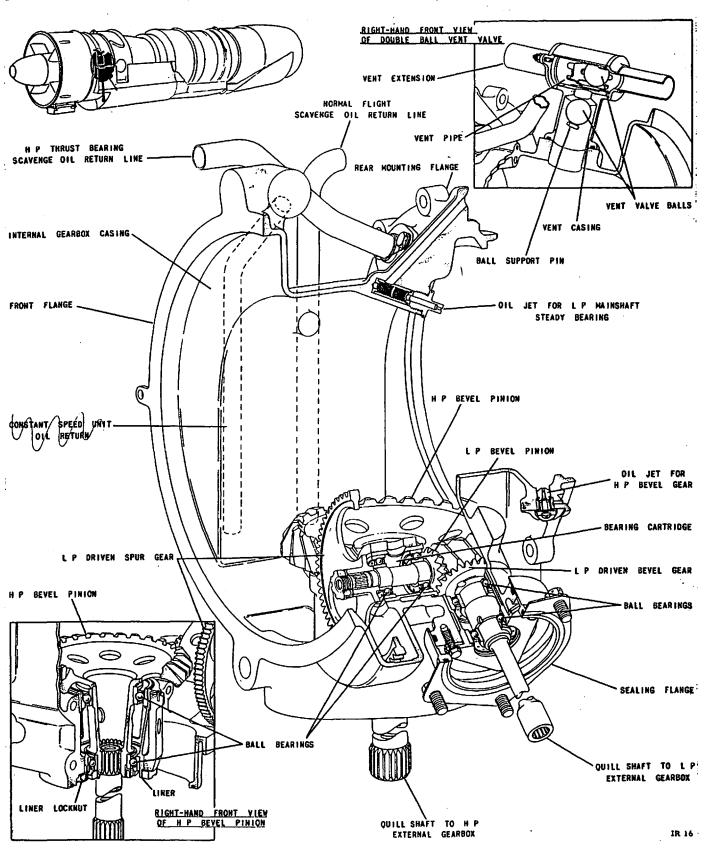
Internal Gearbox and Oil Tank Assembly
